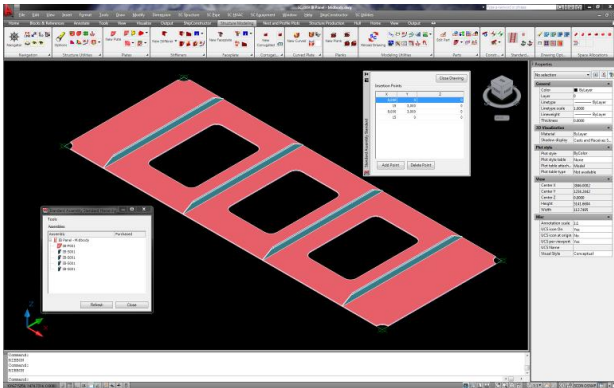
An Inner Bottom panel defined as a Standard Assembly
